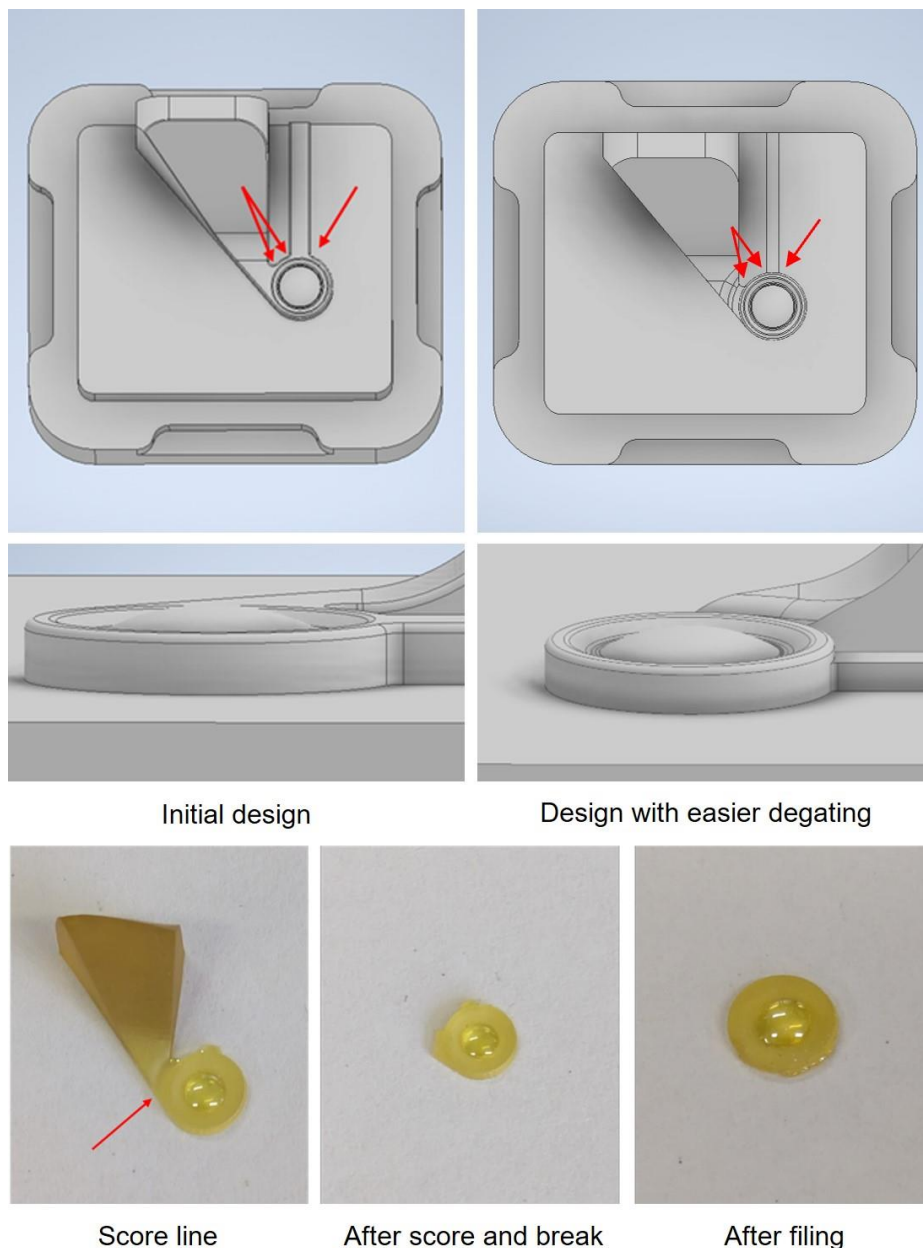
Mould prototyping to improve degating of funnel and air outlet. Red arrows indication location of scores.
